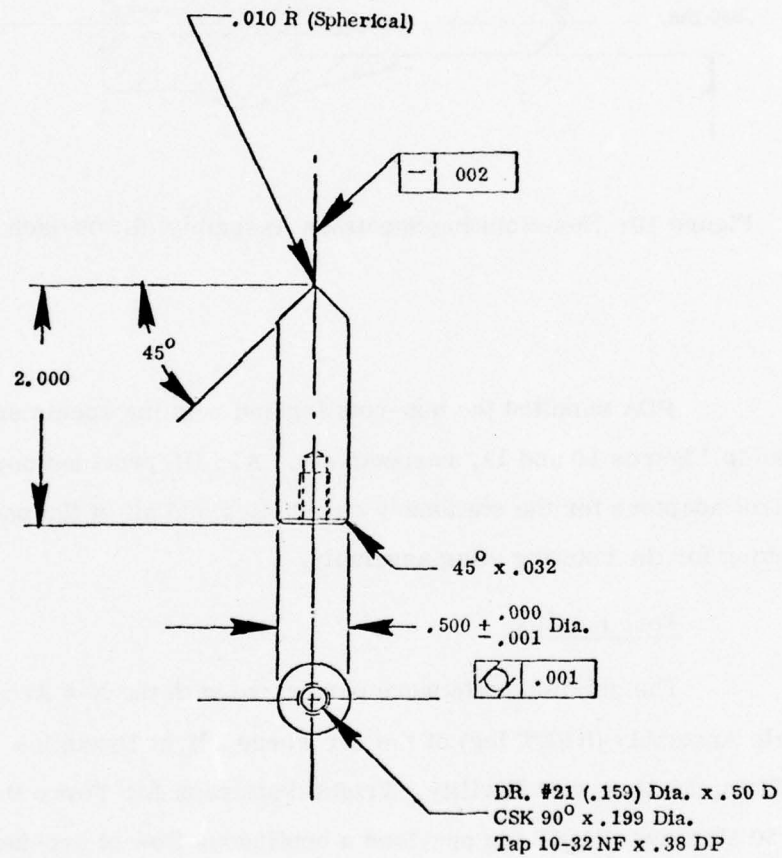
Cone-Cylinder Specimen (0.500-Inch Diameter)
